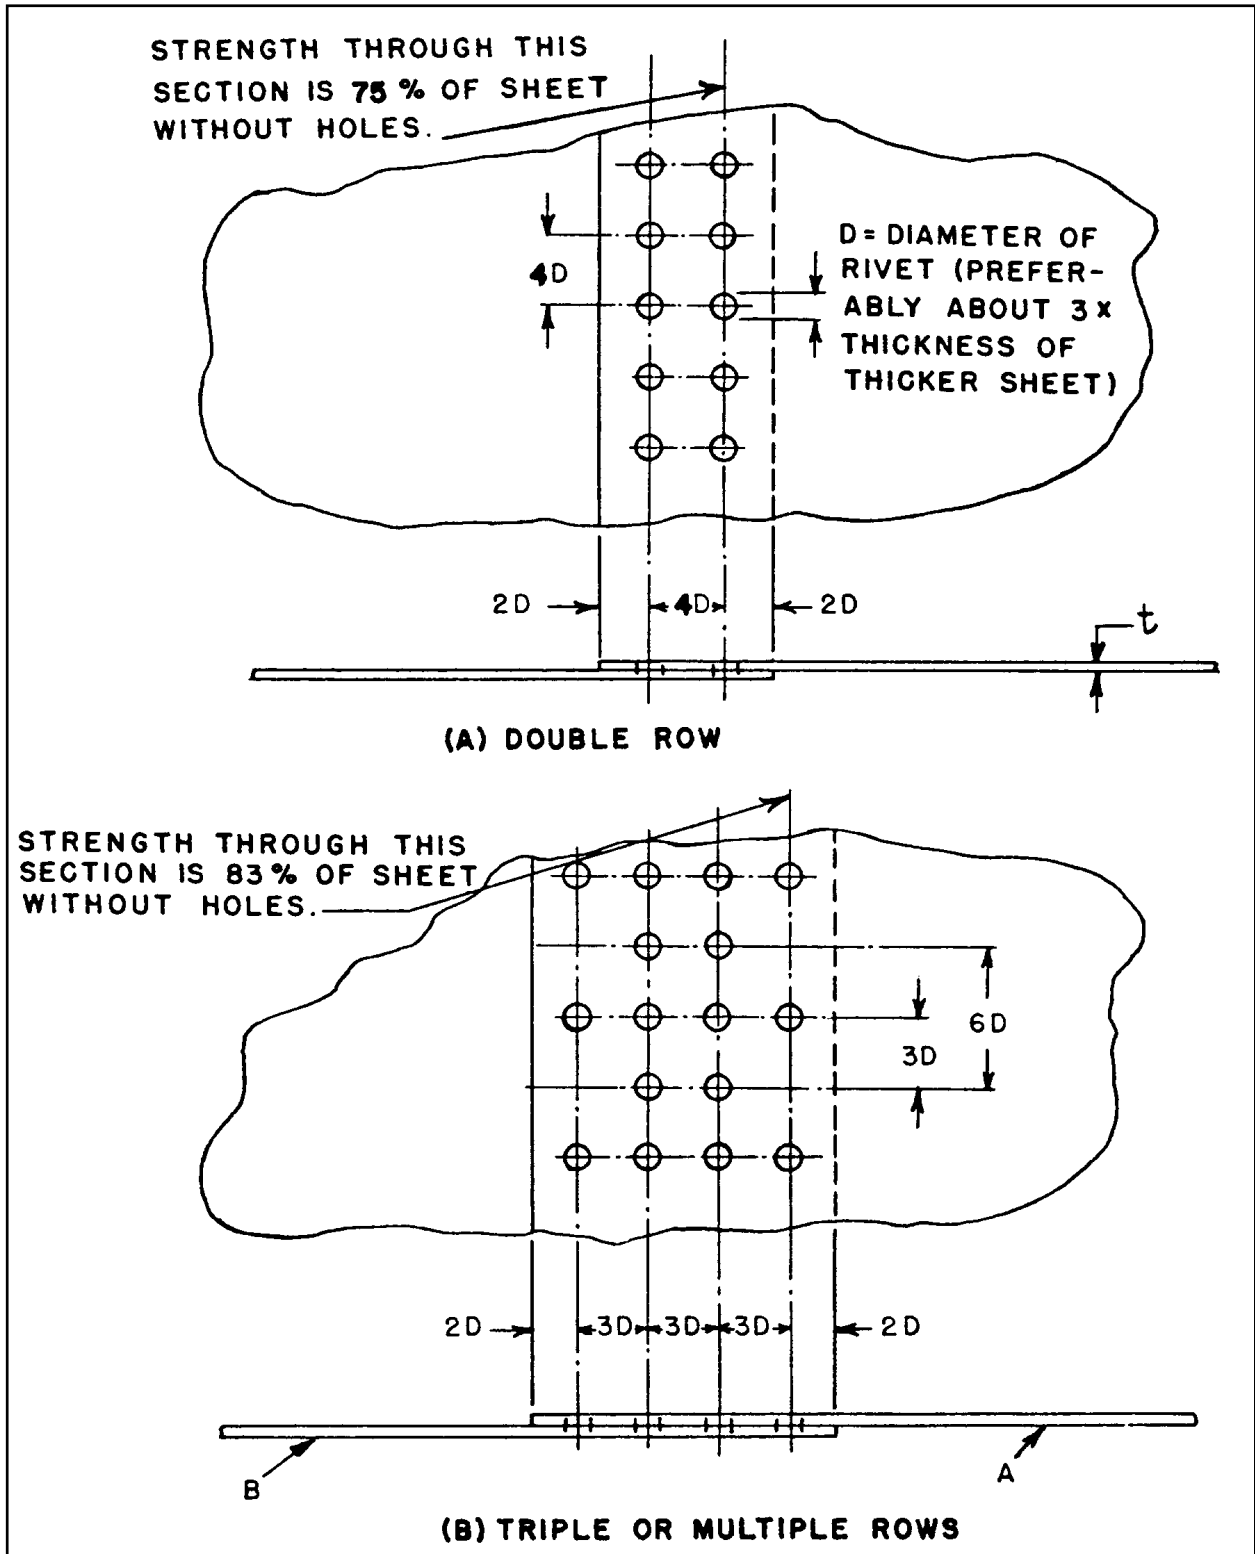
Rivet hole spacing and edge distance for single-lap sheet splices.
